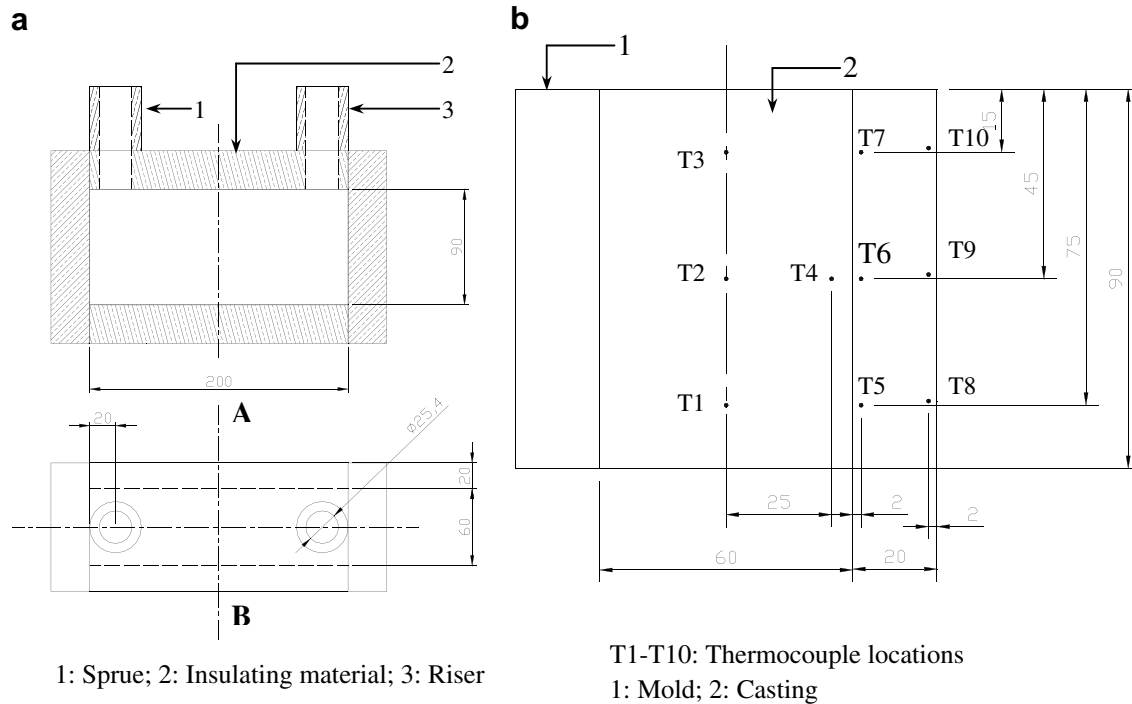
(a) Sectional view and top view of the mold cavity and (b) section of casting and mold wall along A-B.
